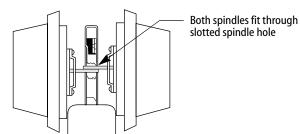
Side view of double-keyed cylinder deadbolt spindles
